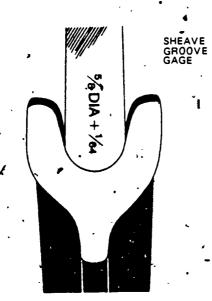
Careful sheave groove inspection is accomplished with sheave groove gage.
